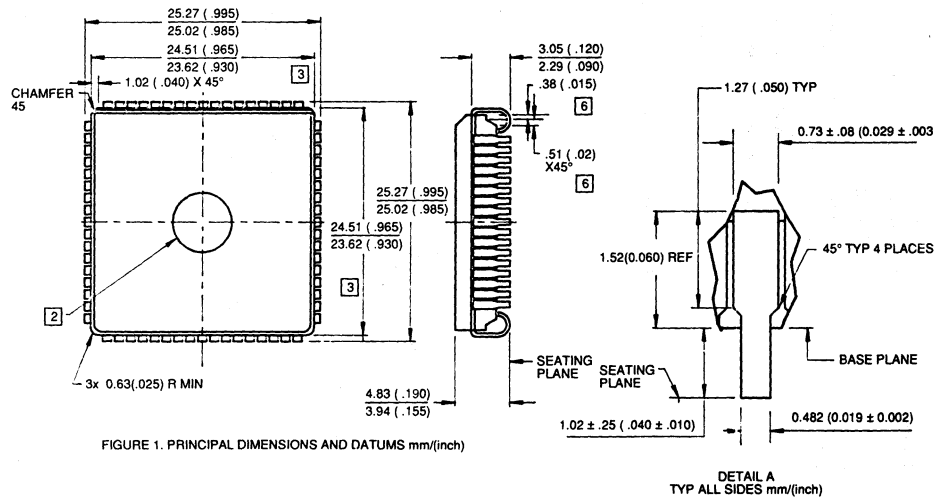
PRINCIPAL DIMENSIONS AND DATUMS mm/(inch)
